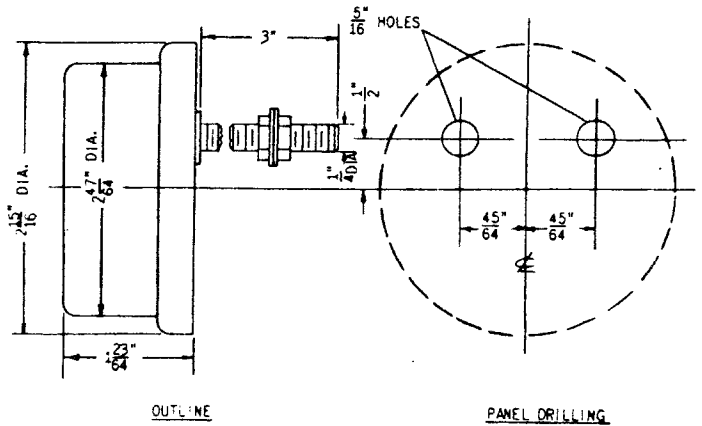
Outline and Panel Drilling Dimensions Diagram for Test Voltmeter (1/8 inch maximum panel thickness) used with PVD Test Equipment
